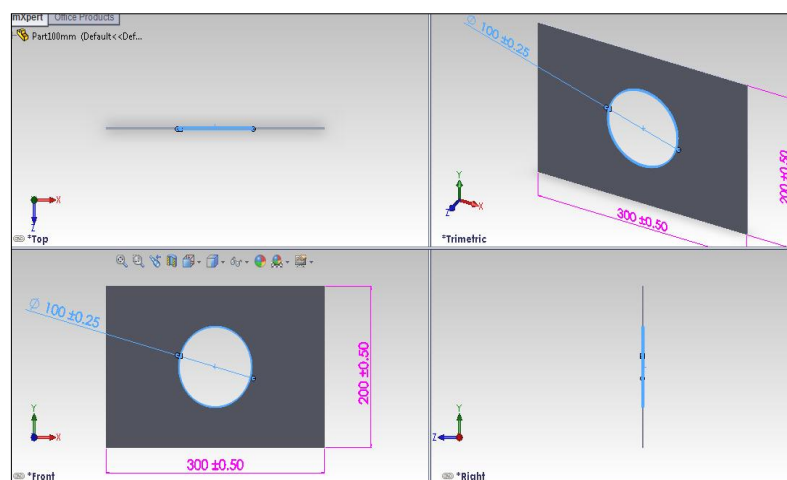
Flat plate with 100mm diameter eccentric hole.
